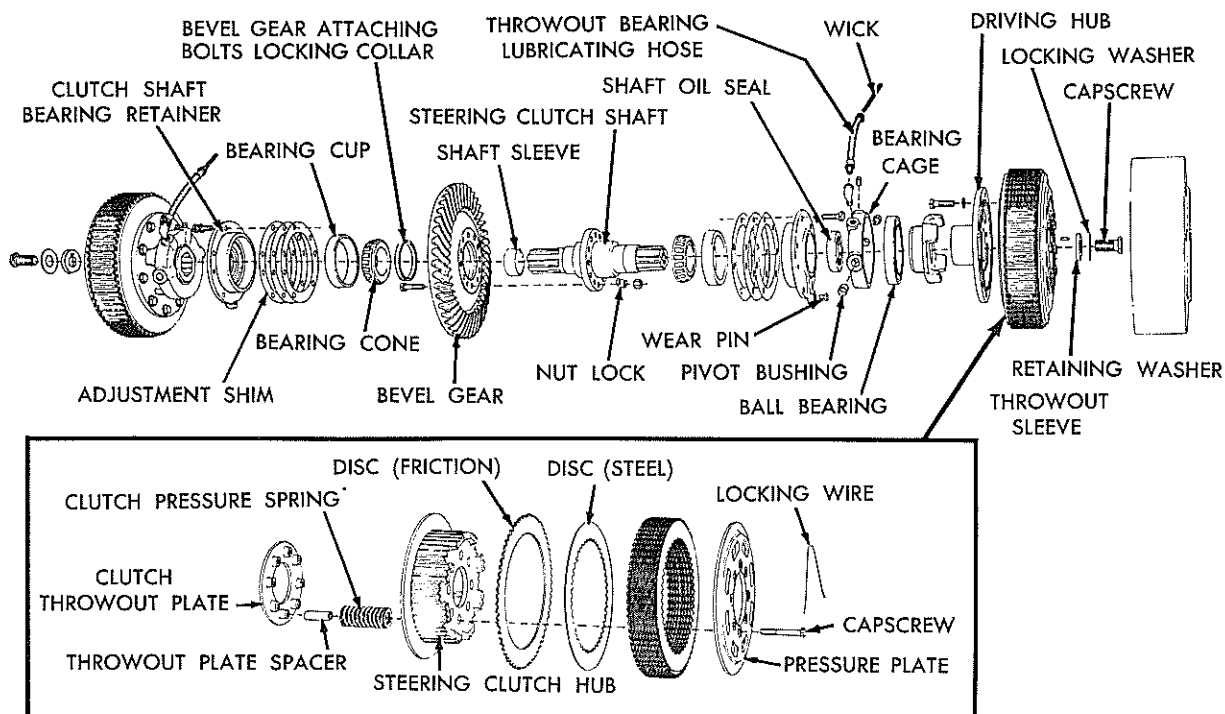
Steering Clutch, Brake Drum, and Brake Band
